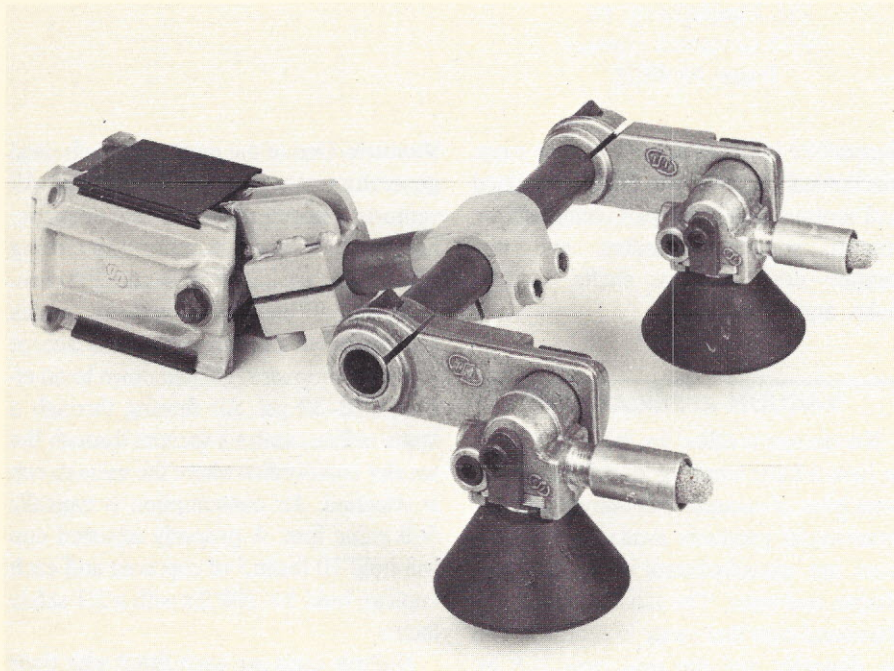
Multiple vacuum cups can be used when the payload is heavy or difficult to balance.
